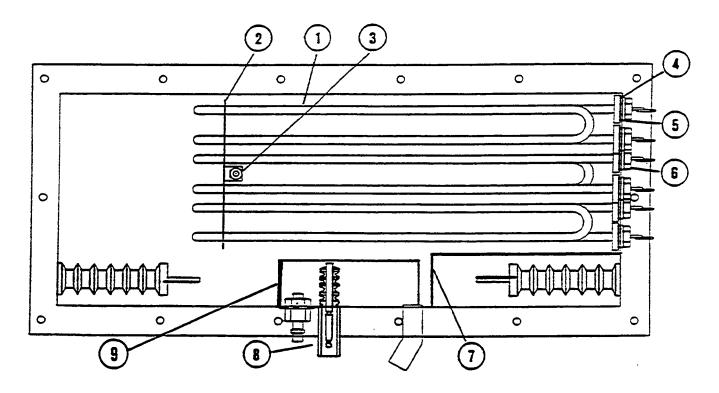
TOP VIEW - Steam Generator Assembly\
